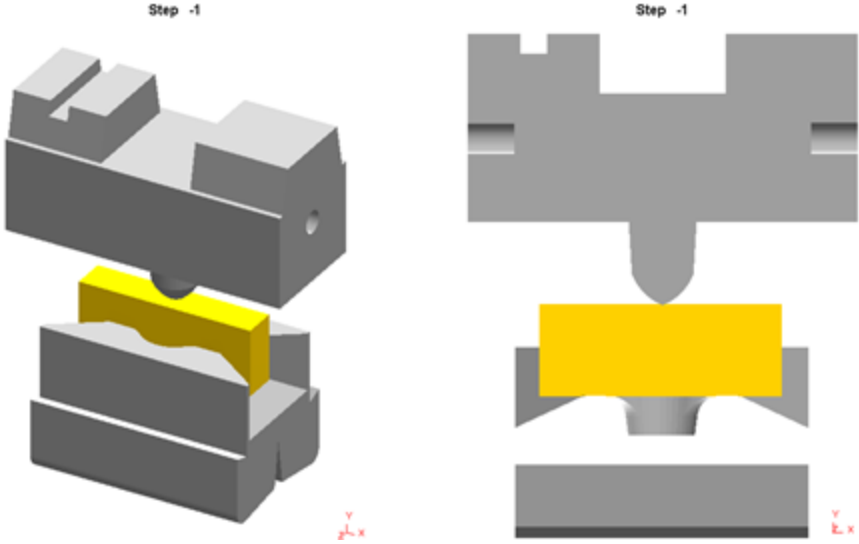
sectional view of work piece lower die, and upper die setup before forging process
